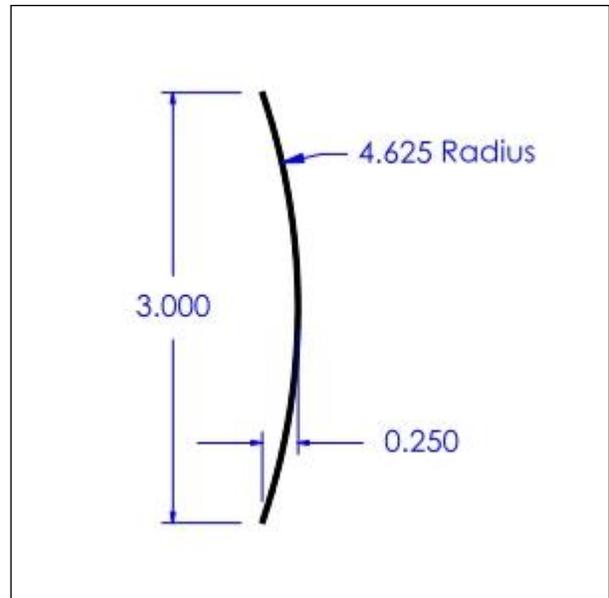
Construction drawing of the bob profile. The material used is $\frac{1}{32}$ " brass sheet. The diameter shown is the approximate finished dimension.
